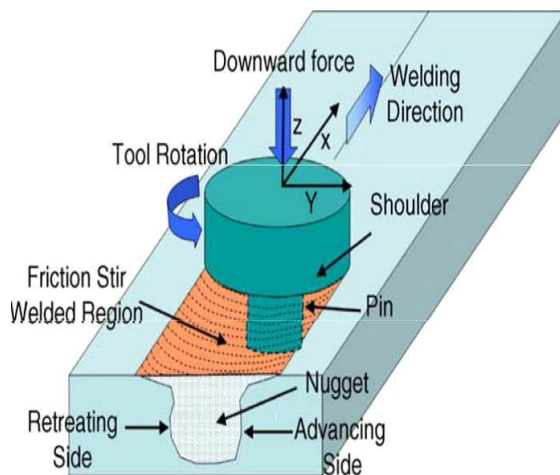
Principle drawing of the FSW process for joints with indication of the main parameters
